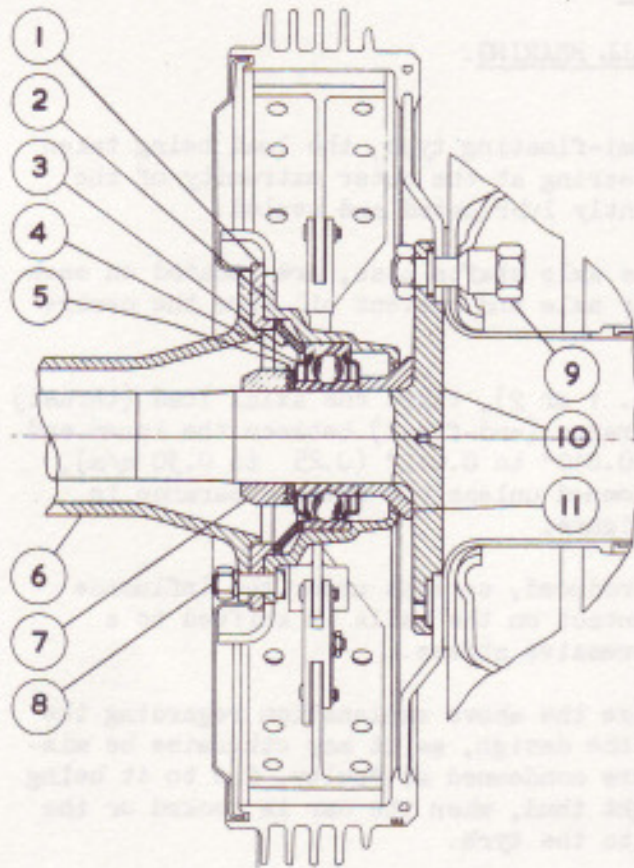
shows a sectional view through the rear axle shaft and road wheel ball bearing for series 'AK', 'AJ', 'BH' and 'BG, and Fig. 2. shows a sectional view through the rear axle shaft and road wheel ball bearing for series 'CF', 'CD' and onwards. It should be noted that the latter type is interchangeable with the early type and the former may be supplied as a replacement for all series.
